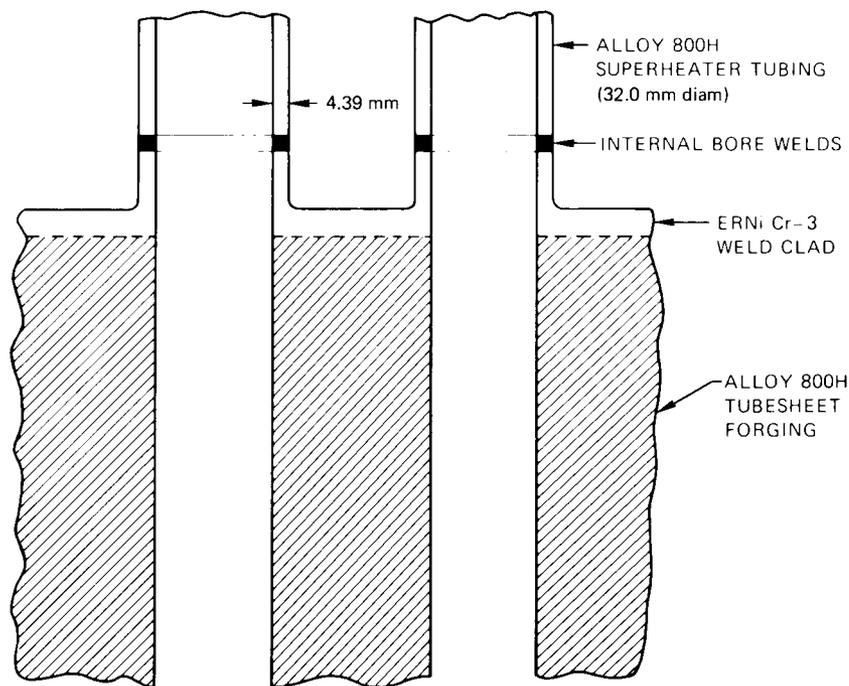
Weld cladding of the superheater tubesheet forging is required to provide material for joining tubes to the tubesheet by internal bore welding.
